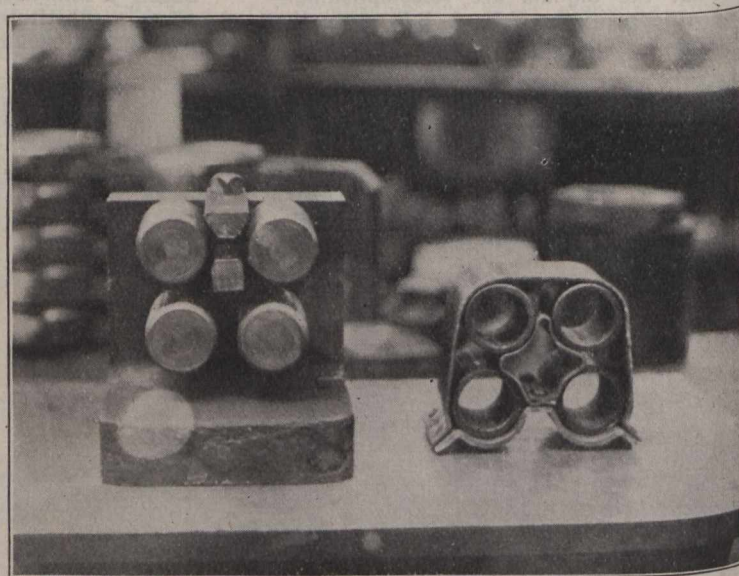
Jig for Drilling Superheater Tube Clips, With an Assembled Clip.
